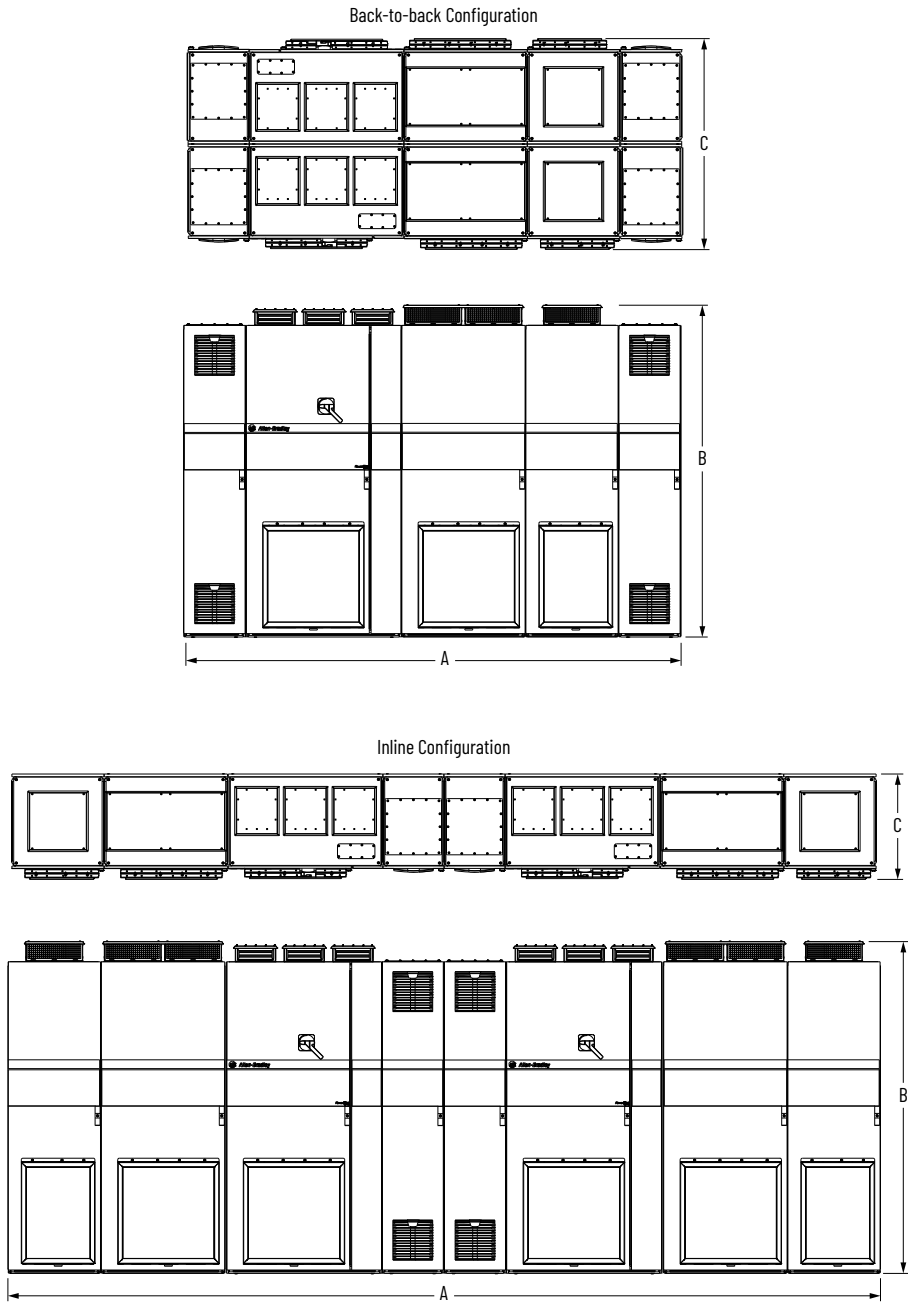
Frame 12 Bus Supplies Top, Front, and Bottom Views—Dimensions are in mm (in.)
